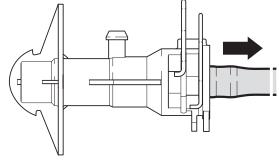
With the connector pulled out and the clips opened, the bleed hole is open
